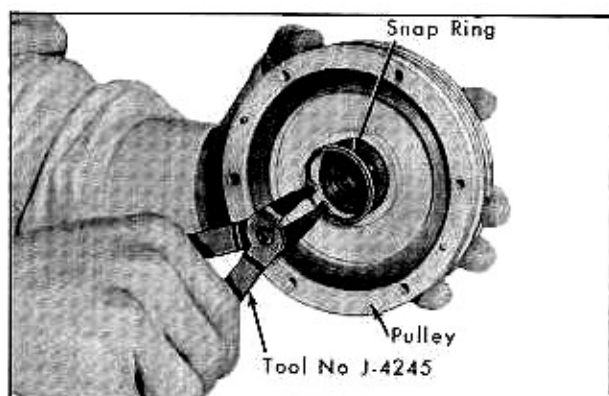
A-19 Removing Pulley Bearing Snap Ring
